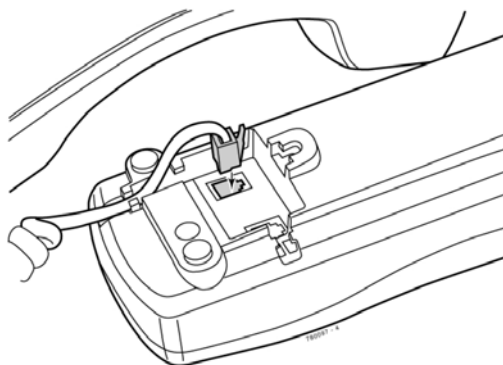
Installing the UTR-1-1() USB Handset Cable
